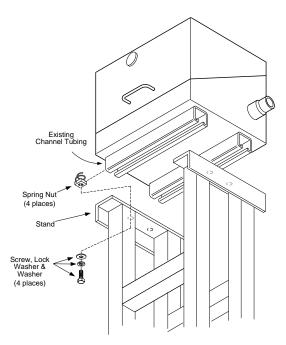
ENC82S-Enclosure Mounting Hardware
